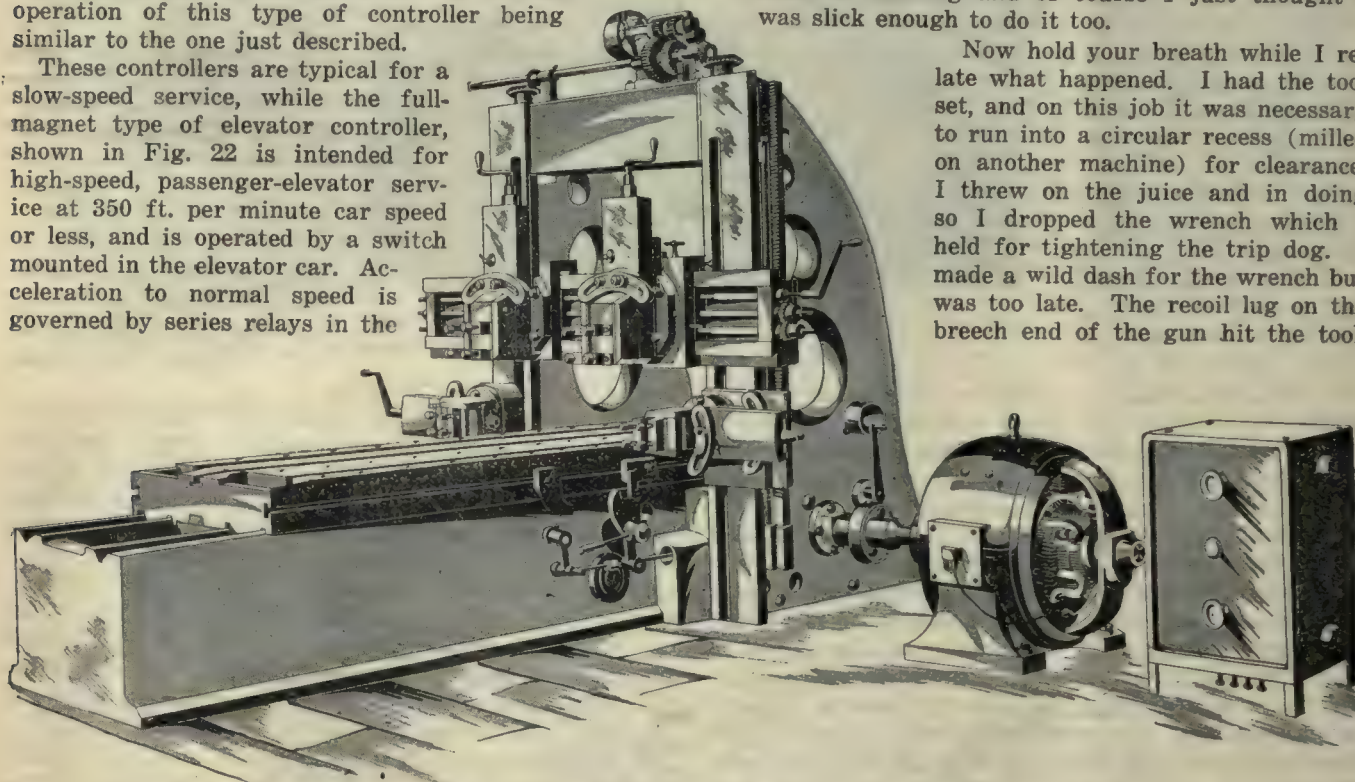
THE CONTROLLER ATTACHED TO A PLANING MACHINE
